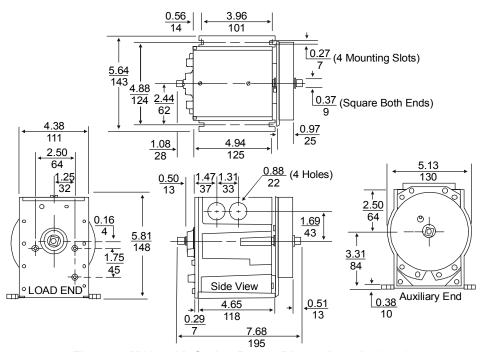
M100 with Spring Return Dimensions, in. (mm)
